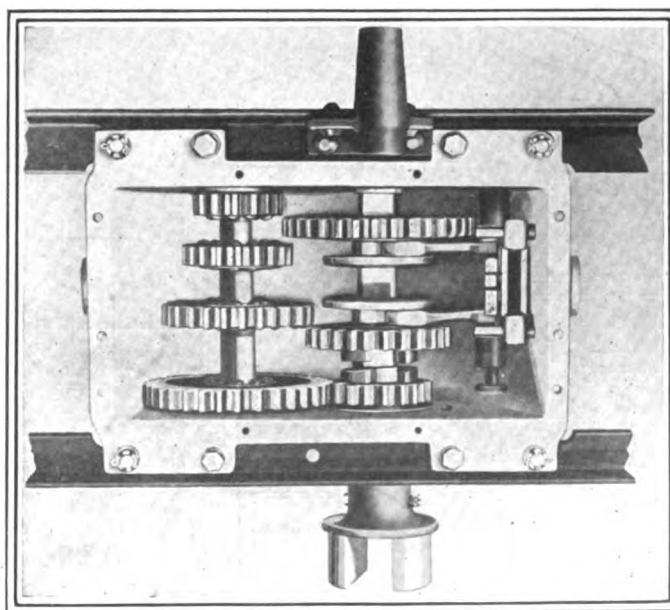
Looking down into the Franklin gearset housing with the cover removed
